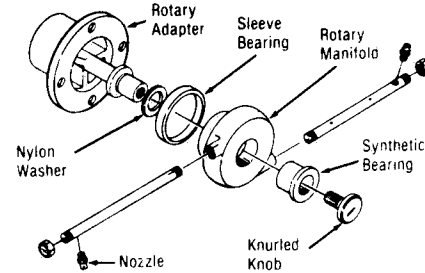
REVOLVING WASH SPRAY ASSEMBLY.
